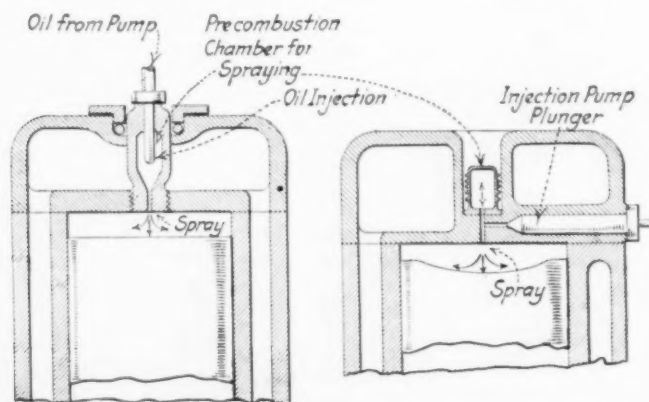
FIRST STEINBECKER COLD COMBUSTION CHAMBER
